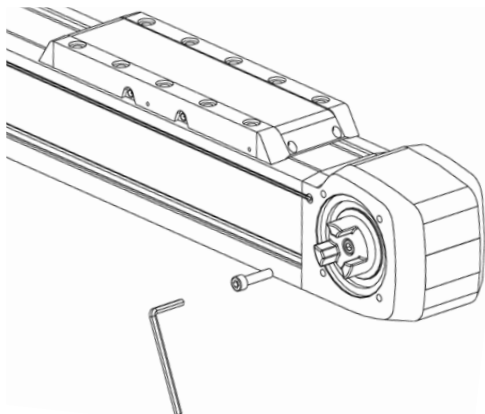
Mounting the expansion hub by tightening the expanding mandrel
